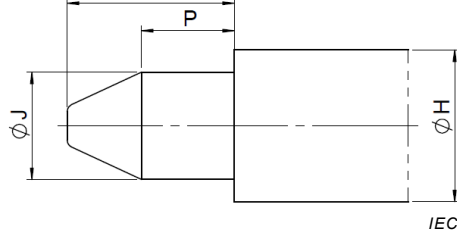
Details of pin-centre contact (for dimensions, see Table 2)
